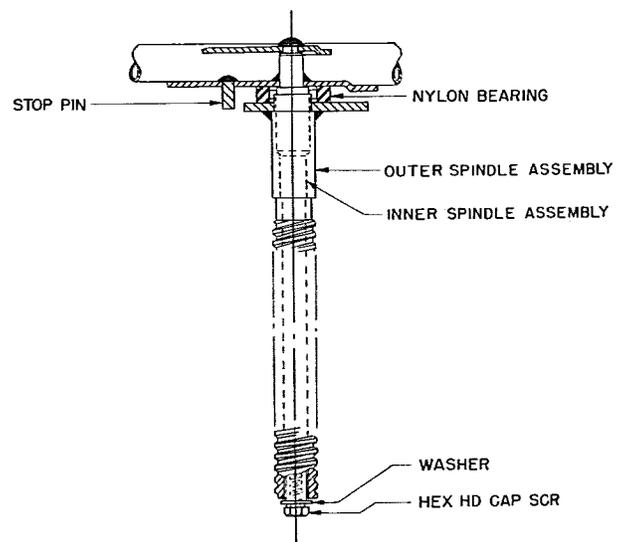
C—Stop-pin-type Spindle—Nylon Bearing
